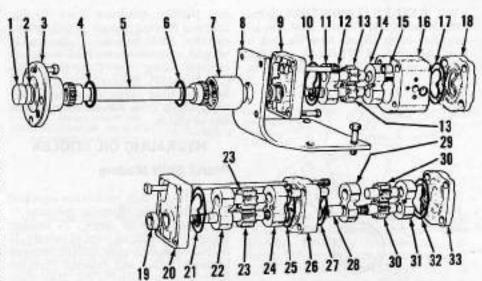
Exploded view of front mounted single and tandem hydraulic pump.
